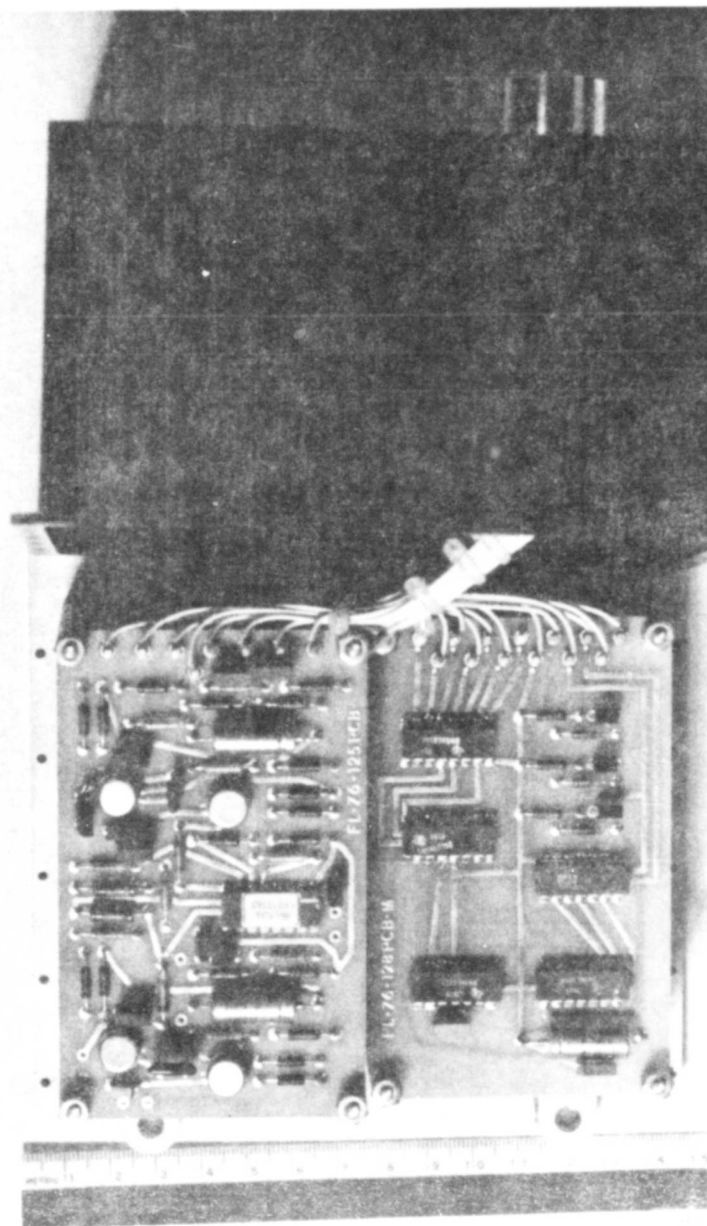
TQCM CONTROLLER SHOWING FREQ/VOLT CONVERTERS BOARD No. 125
